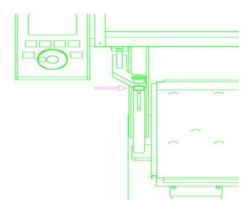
Follower Pin for Slider Assembly, Preparative Version
